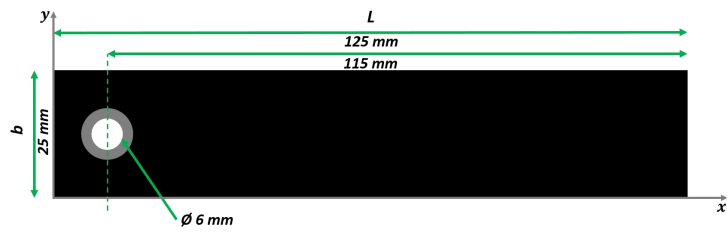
Dimensions of the composite coupons to be welded and tested with double cantilever beam tests. The grey circle represents the countersunk hole to insert the loading pin.
